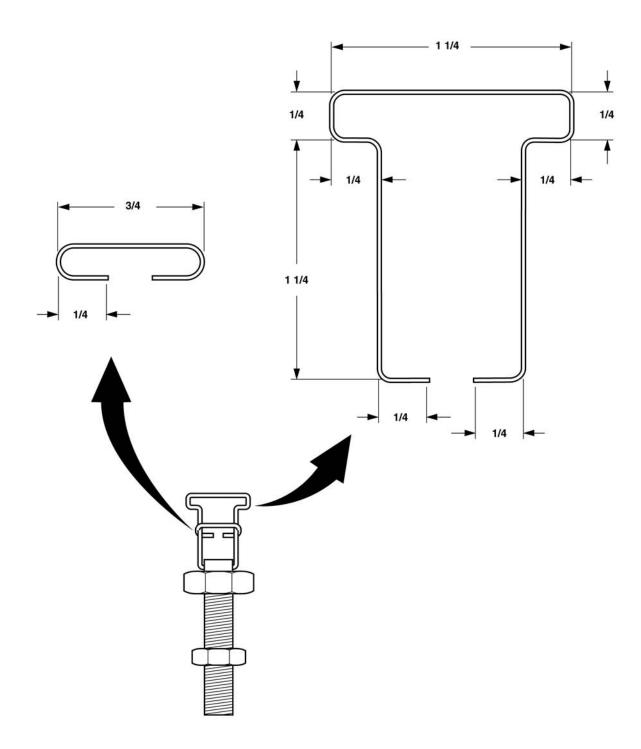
Switch Box Load Terminal Repair (A, B, & C Models)
